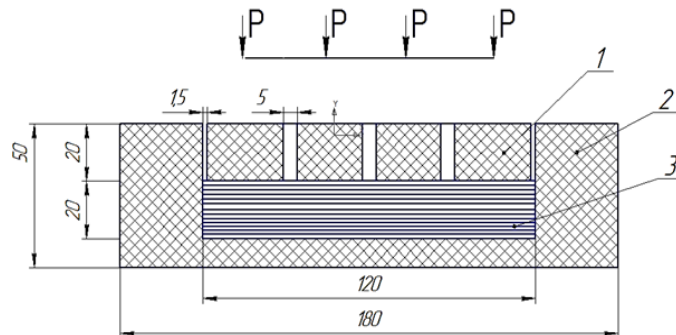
Scheme of Cold Pressing of Composites: 1 - Cover with A Press; 2 - Form; 3 - Molded Composite.
